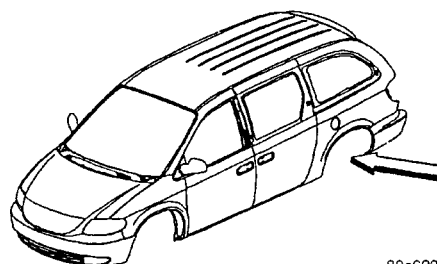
LEFT SIDE SEAT ANCHOR REINFORCEMENT - SHORT WHEEL BASE ONLY
